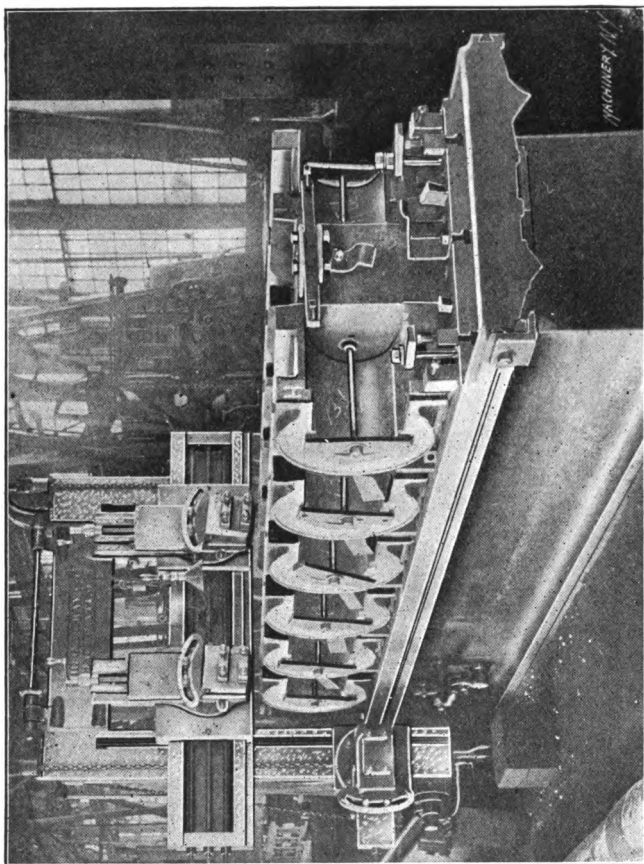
Planing the Shoe and Wedge Fits in the Main Bearing
